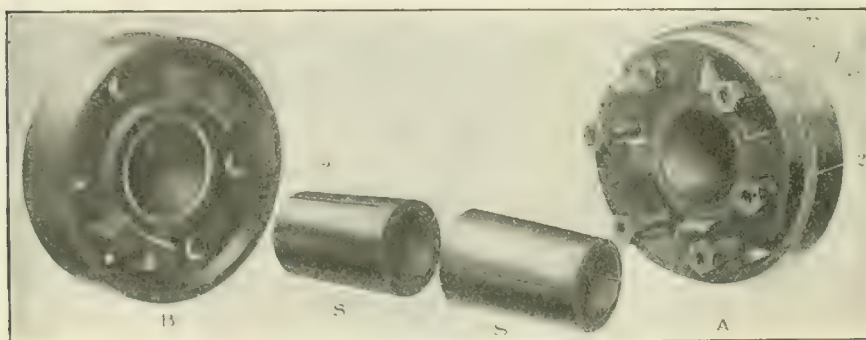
DETAILS OF THE HENDERSHOT SHAFT COUPLING.
